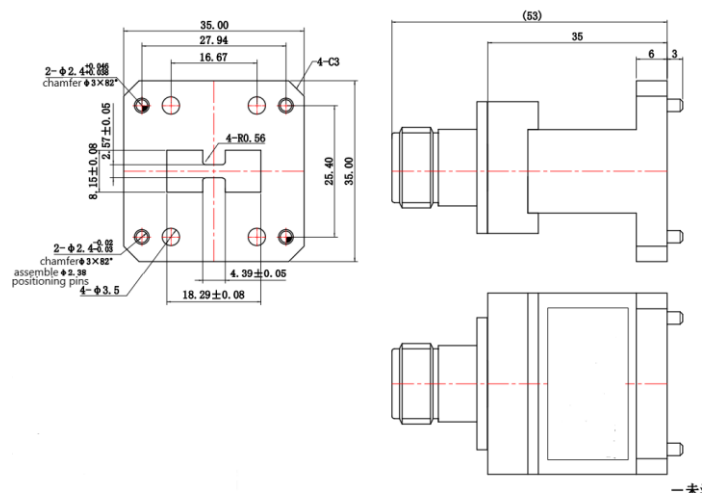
JX-TAC-6G18G-300WNF front panel layout
